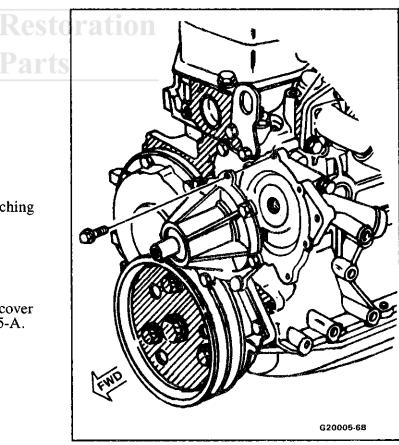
Water Pump Front Cover Assembly Mounting — 2.5L
